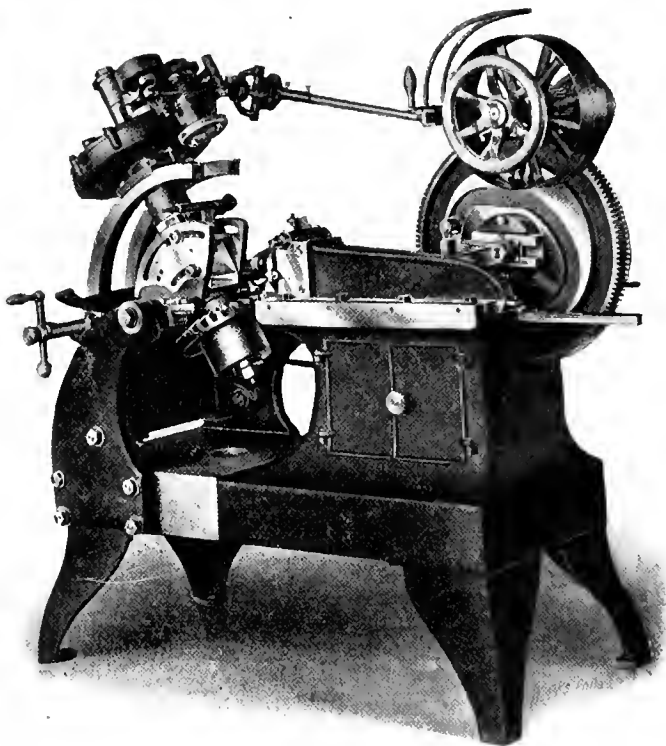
Full Automatic Bilgram Bevel Gear Shaper, working on the Molding-Generating Principle.
